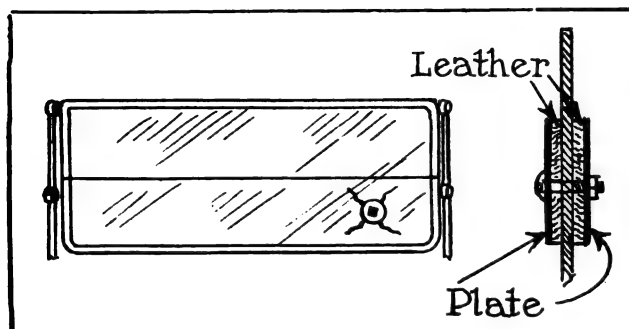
Method of Repairing Cracked Windshield by Bolting Pads Against Edges of Hole.
